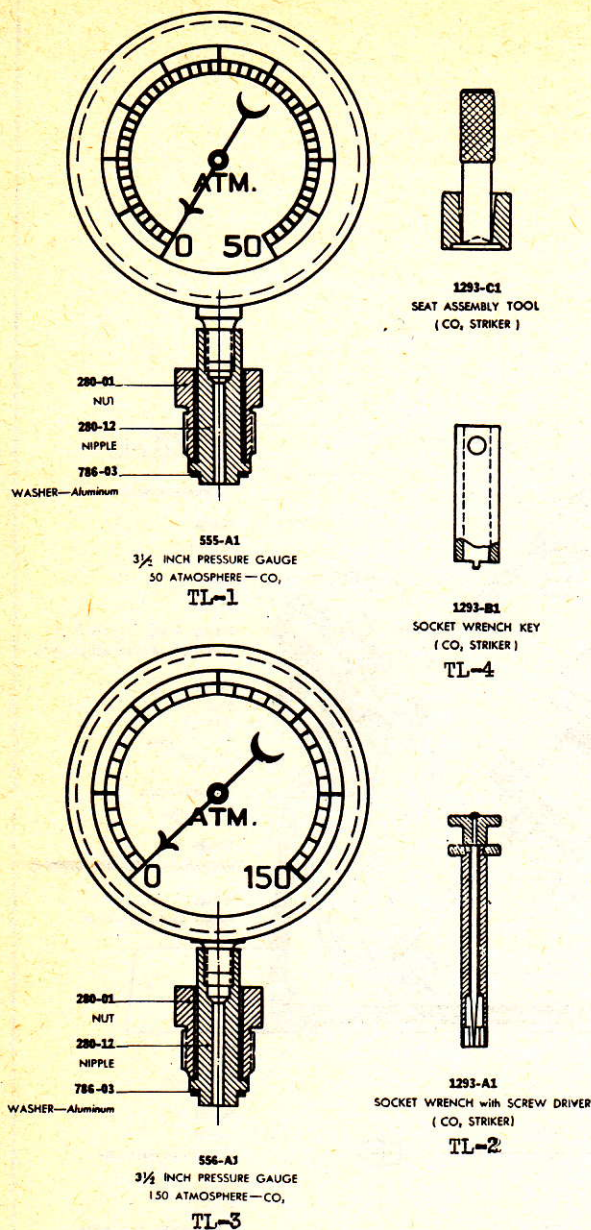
Pressure gages and tools for CO₂ bell striker.
